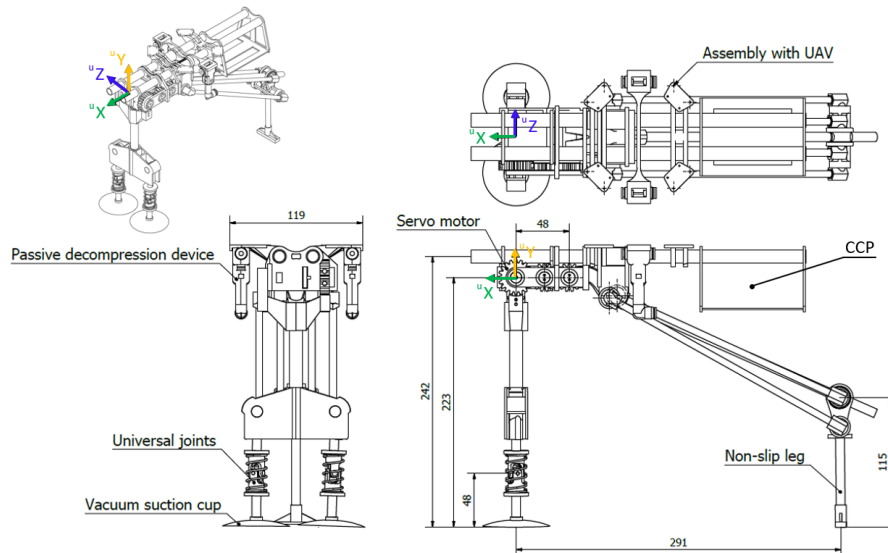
The CAD drawing of the robotic landing gear. A servo motor controls the angle between the front leg and uX axis of the UAV.
